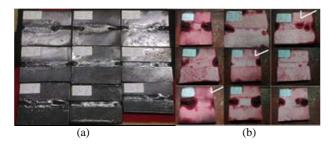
(a) Welded specimens and (b) Result of liquid penetrant testing
